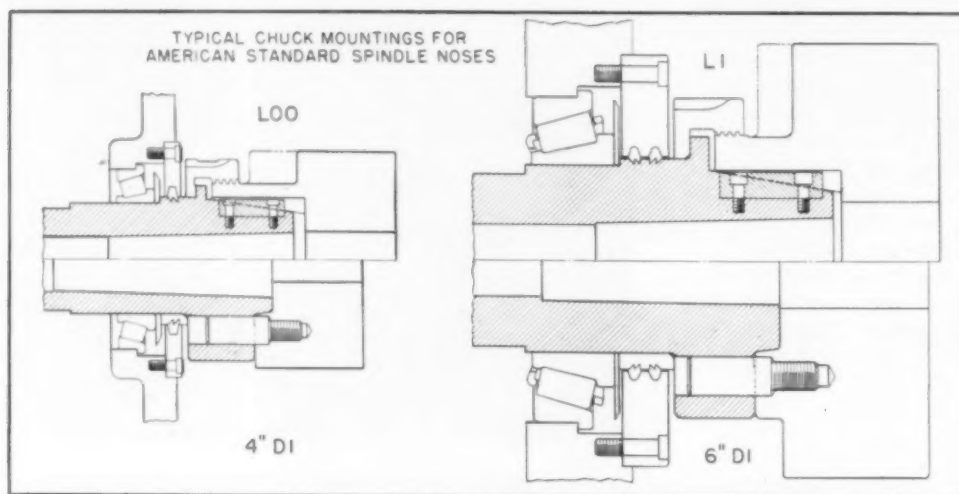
Typical chuck mounting for Type L00 American Standard Spindle Nose.
